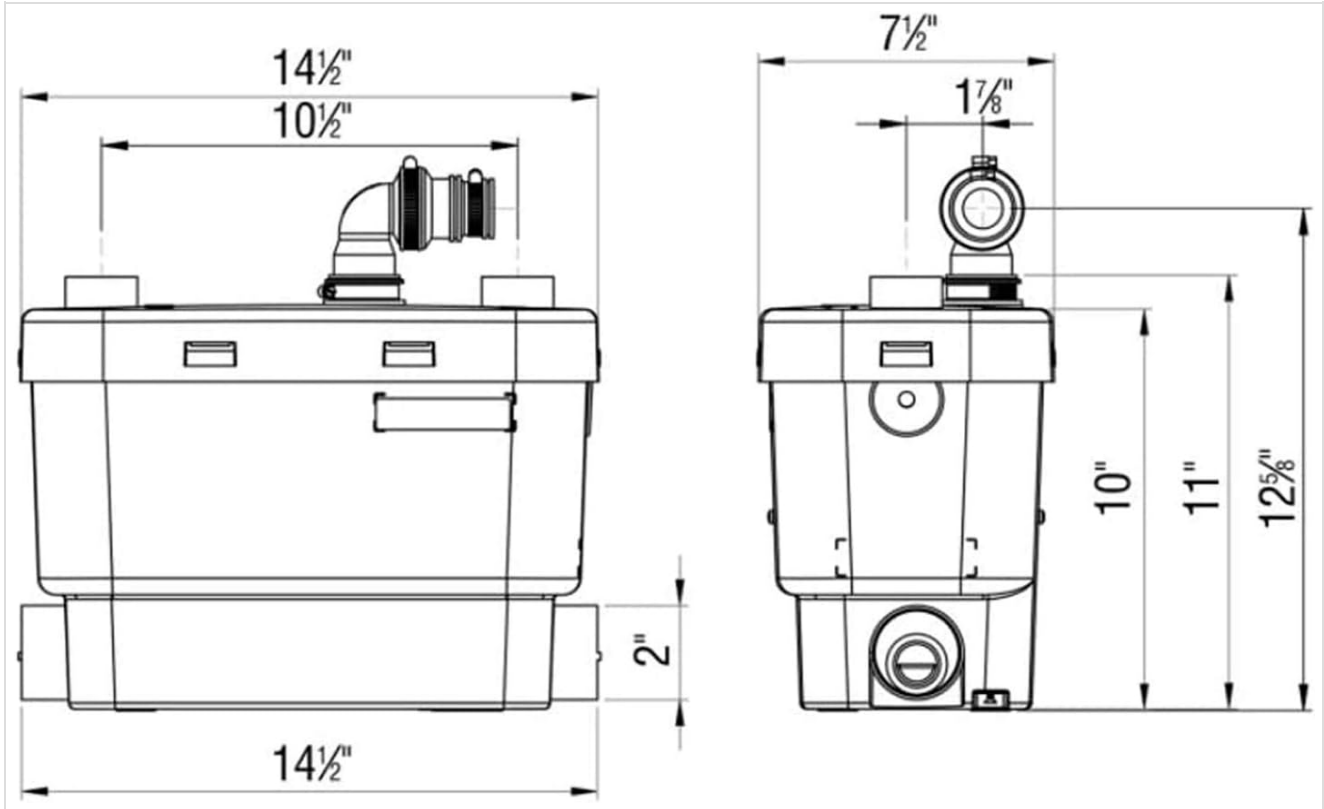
Dimensional drawing of the Saniflo SANIVITE pump, indicating key measurements for installation planning.
